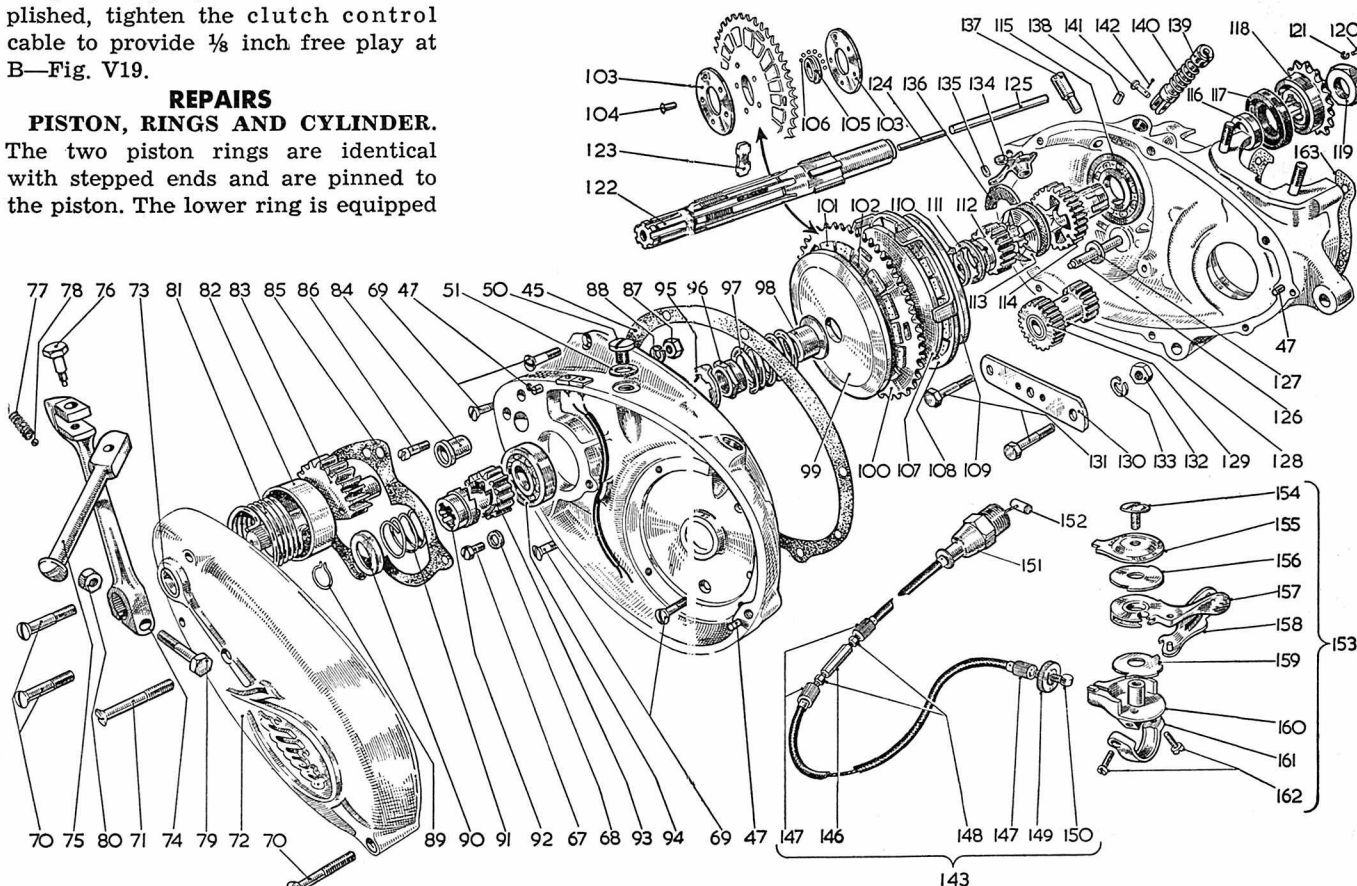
Exploded view of clutch and transmission used on Mark 4F, 6F and 9F.
